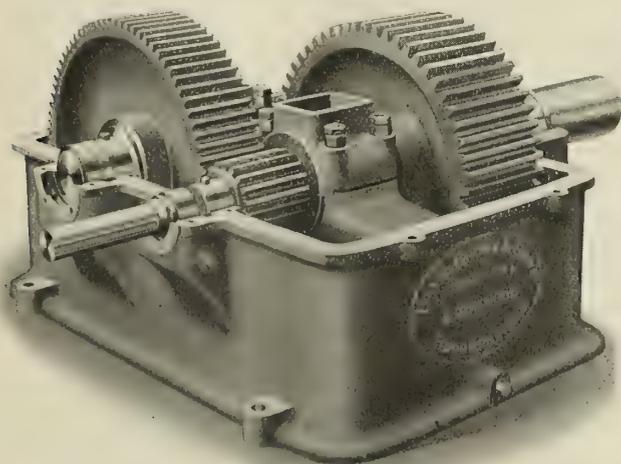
"DBS" STANDARD DOUBLE REDUCTION GEAR
